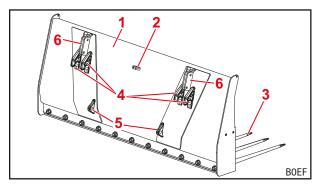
Structure of the manure fork (for FZ 60/60.1/80.1/100 front loaders) – rear view
